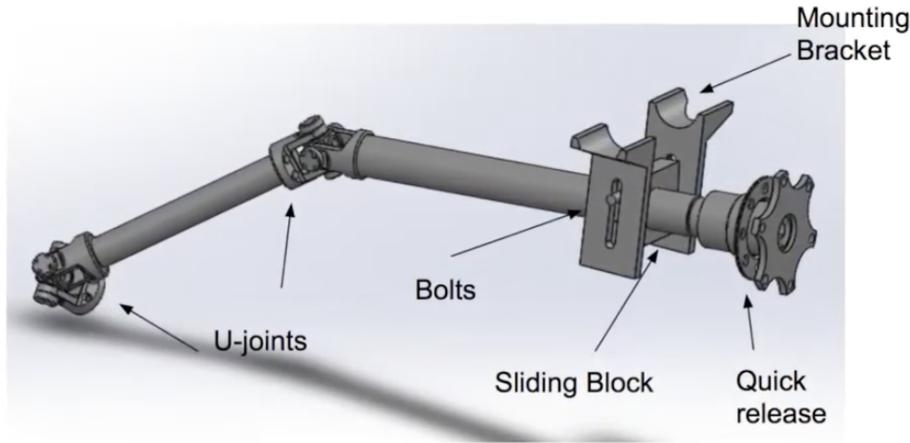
Sub-assembly of the U shaft and joints, mounting bracket, and quick release mechanism [17]
